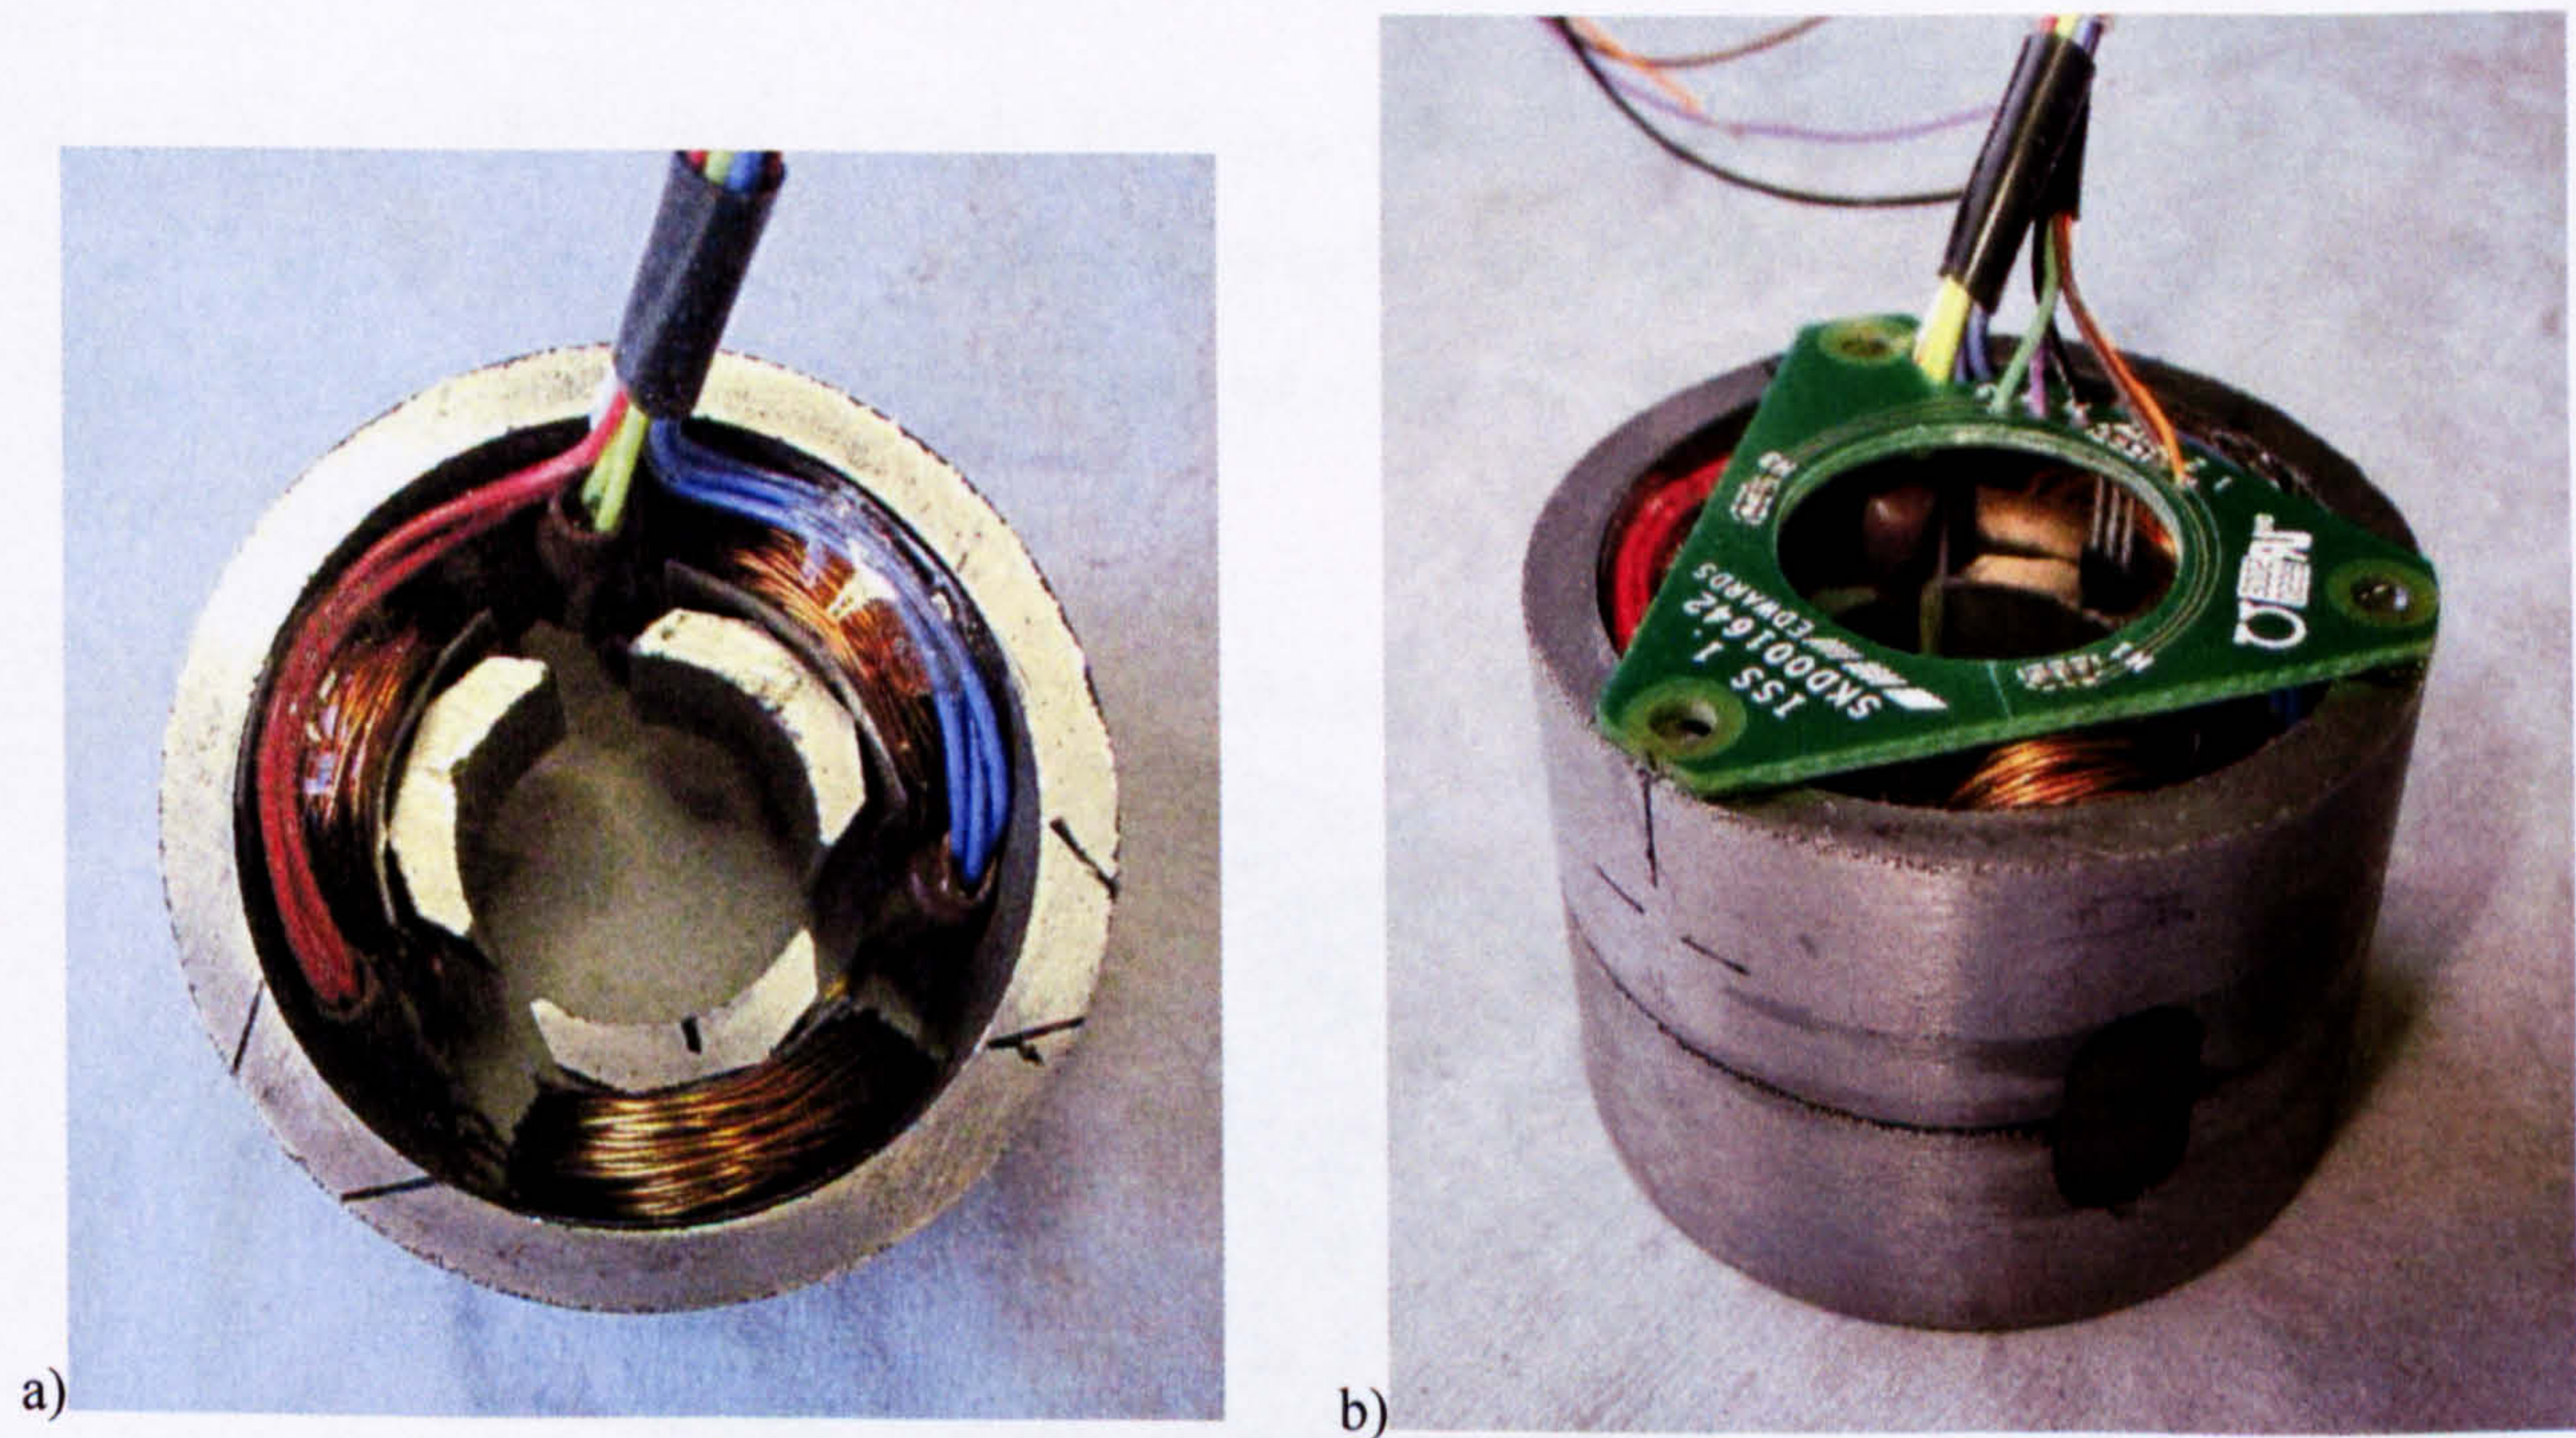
The complete SMC Mk4 stator: a) top view, b) complete with Hall sensor board
